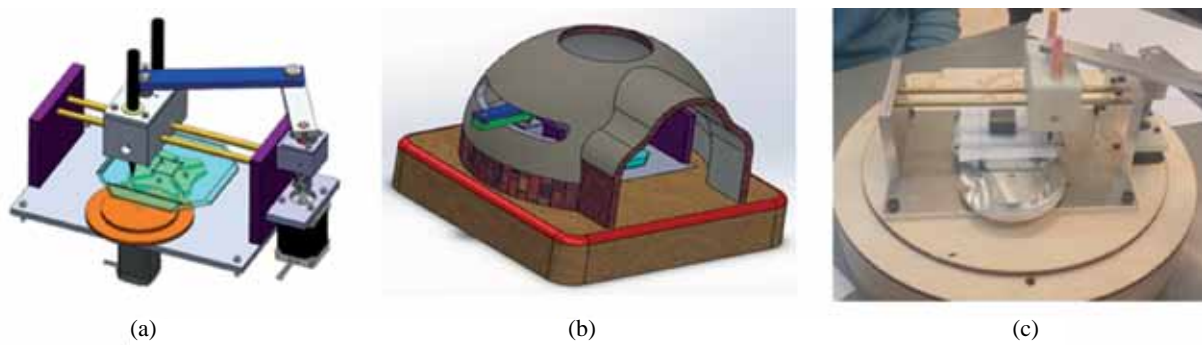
Comparison of the (a) CAD model of Mechanical Design, (b) Mechanical Design *Enveloped* with Industrial Shell and (c) Mechanical Design with Covering Removed for *Enveloped Design
